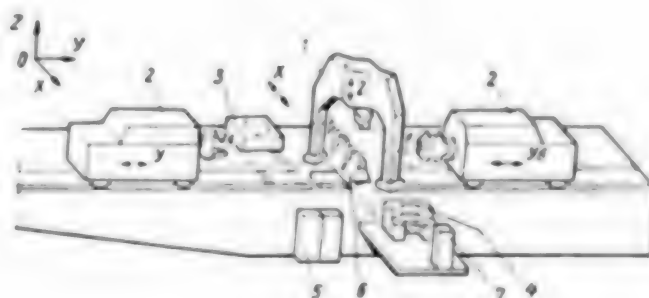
Grouping arrangement of OTs using a hydraulic press-manipulators complex for forging.
